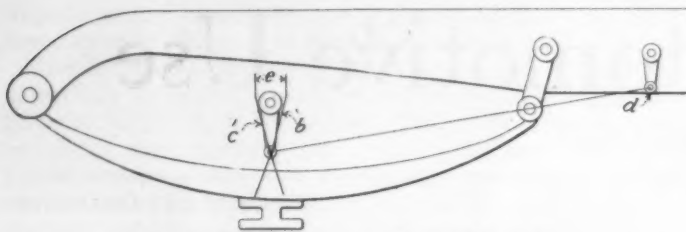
FORMER TYPE OF BRAKE LINKAGE
